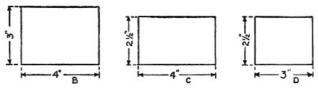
B, a top plan view of the box. C, a side plan view of the box. D, an end plan view of the box
